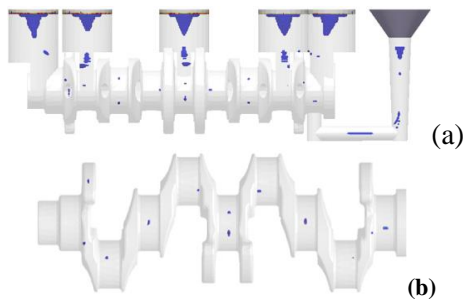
(a) A transparent side view of the Caterpillar crankshaft with five risers. The blue indicates porosity locations within the crankshaft and risers; and (b) a transparent top view with the risers removed so the porosity could be more easily observed.
